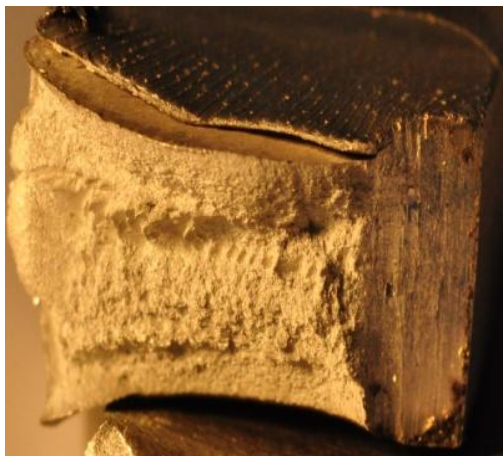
₁. Macrophoto. fracture (500rpm,150mm/min)
